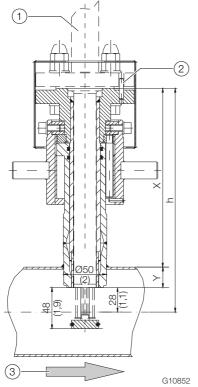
Integrated changing device in measurement position, dimensions in mm (inch)
